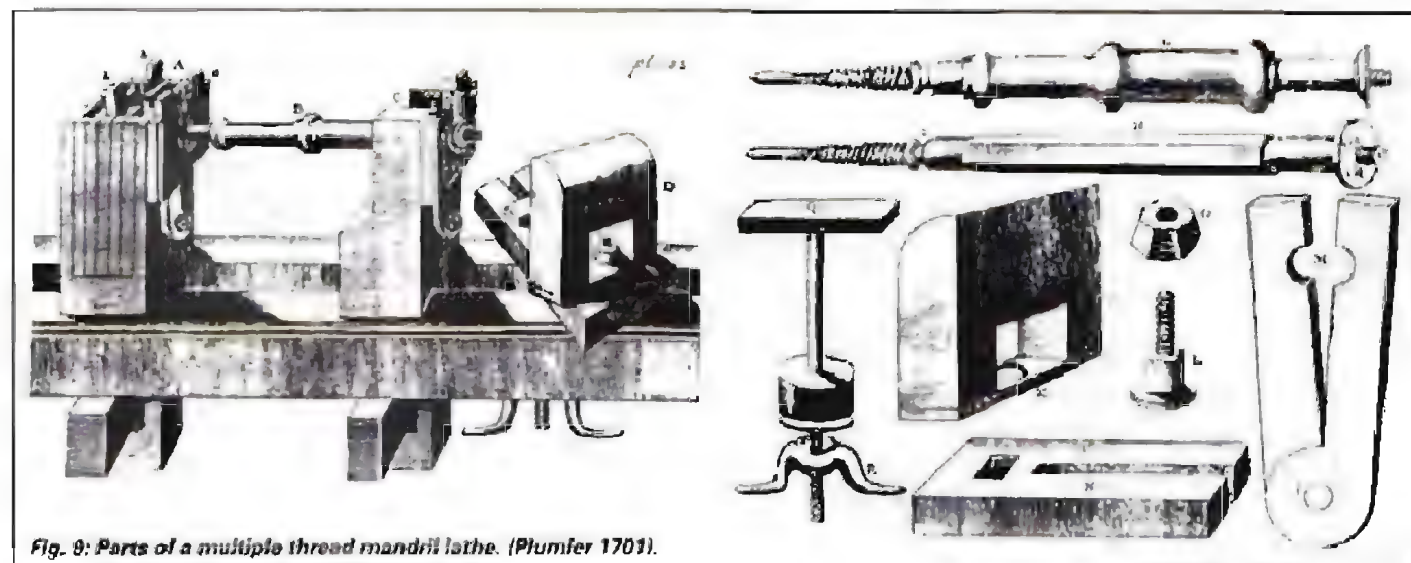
Parts of a multiple thread mandril lathe. (Plumier 1701).
